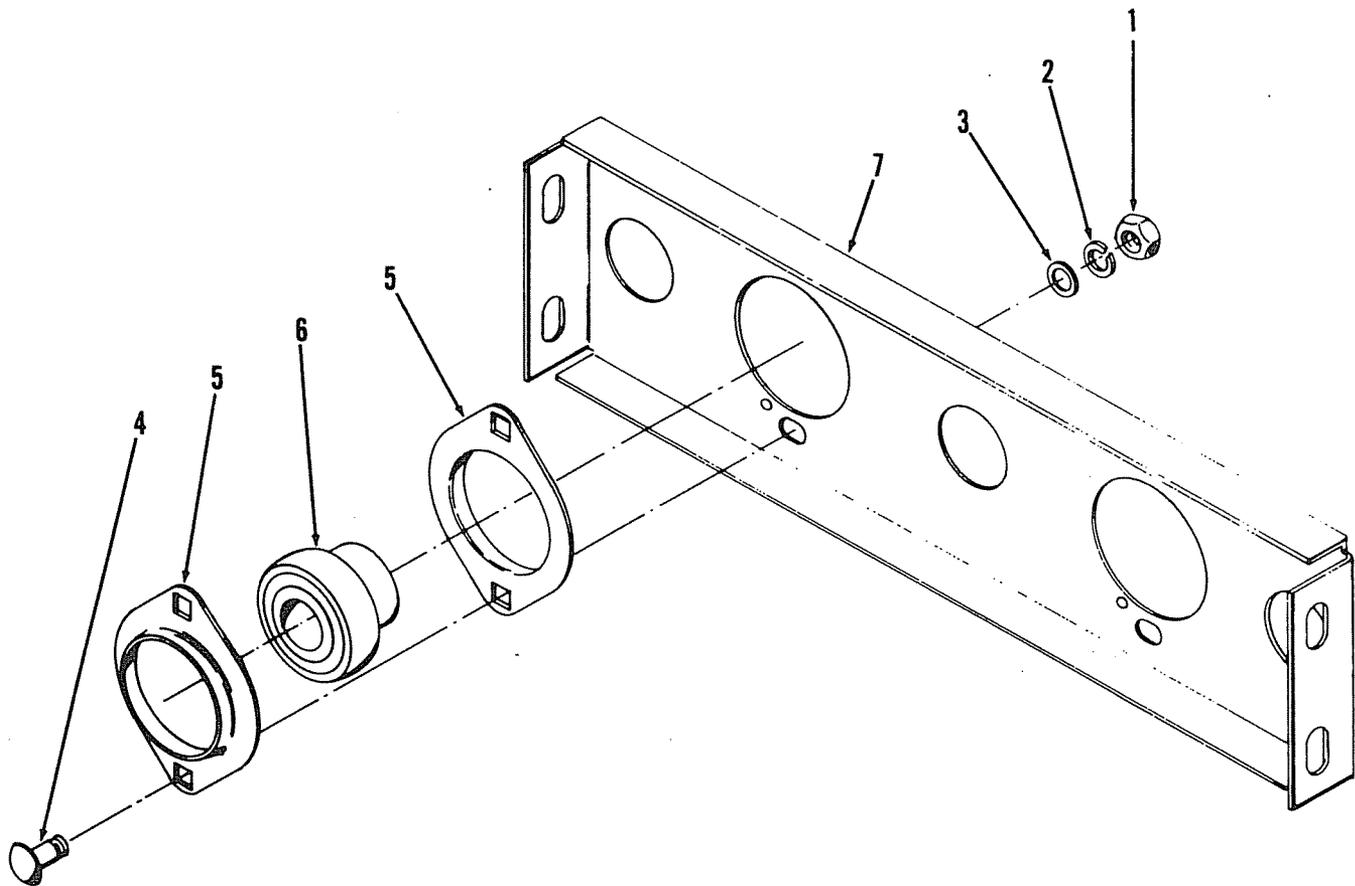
BEARINGS AND SUPPORT BRACKET ASSEMBLY
